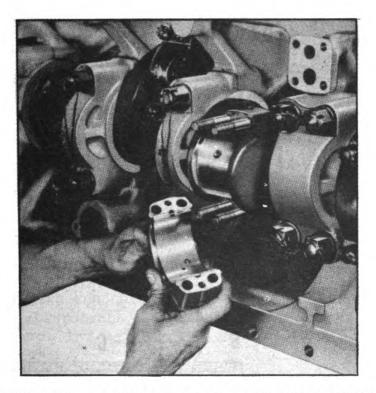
REMOVING CONNECTING ROD BEARING
